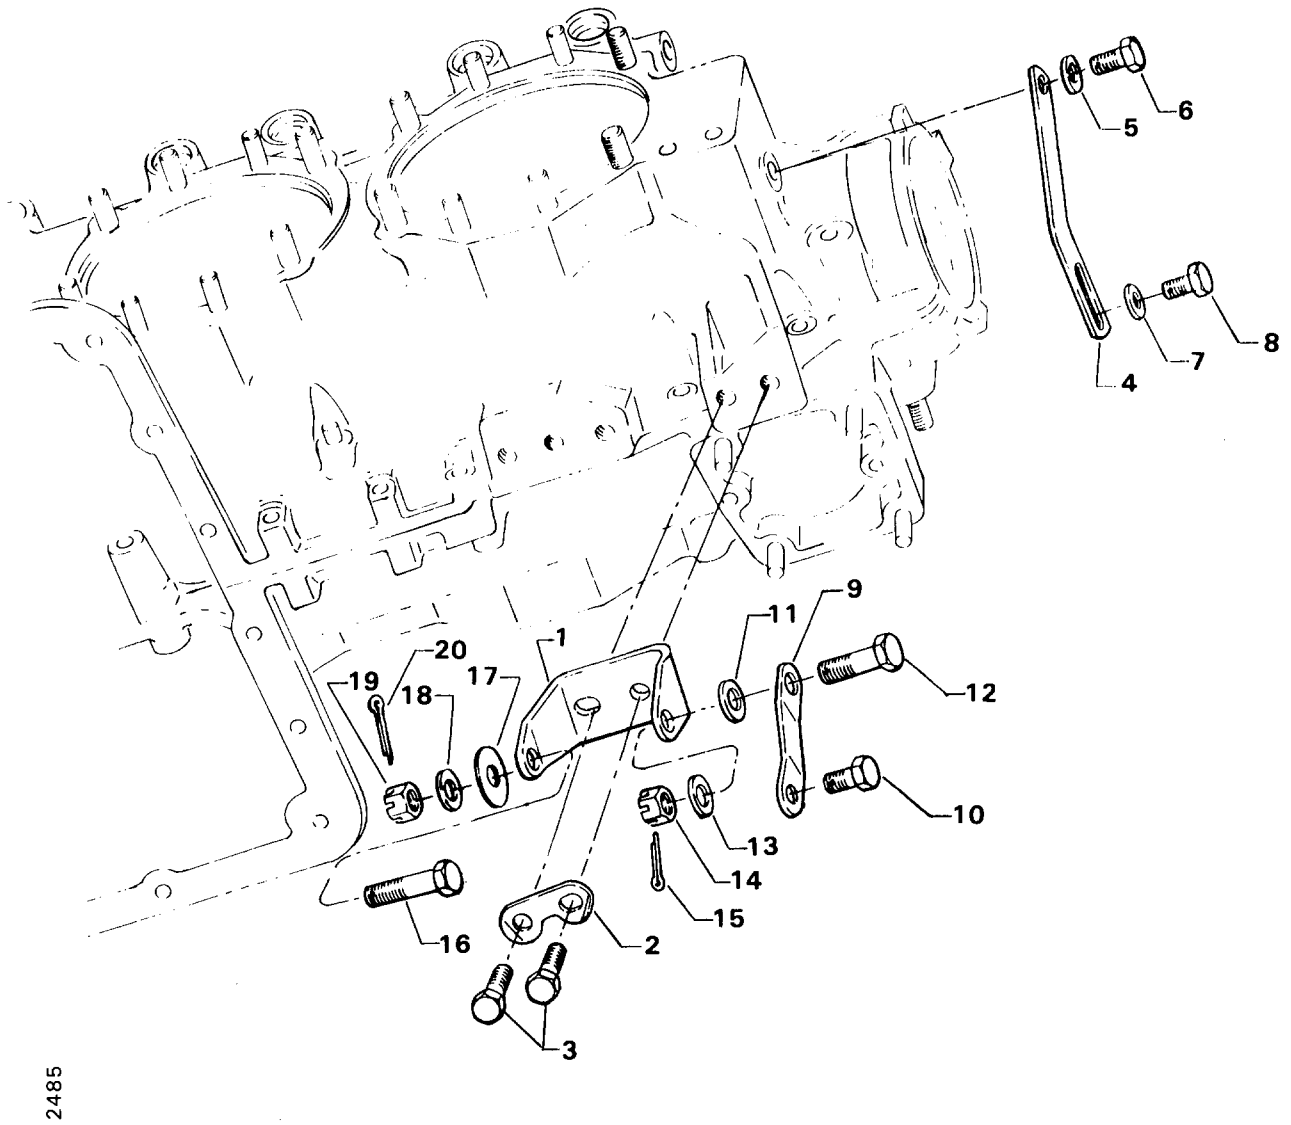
ALTERNATOR MOUNTING AND ATTACHING PARTS
